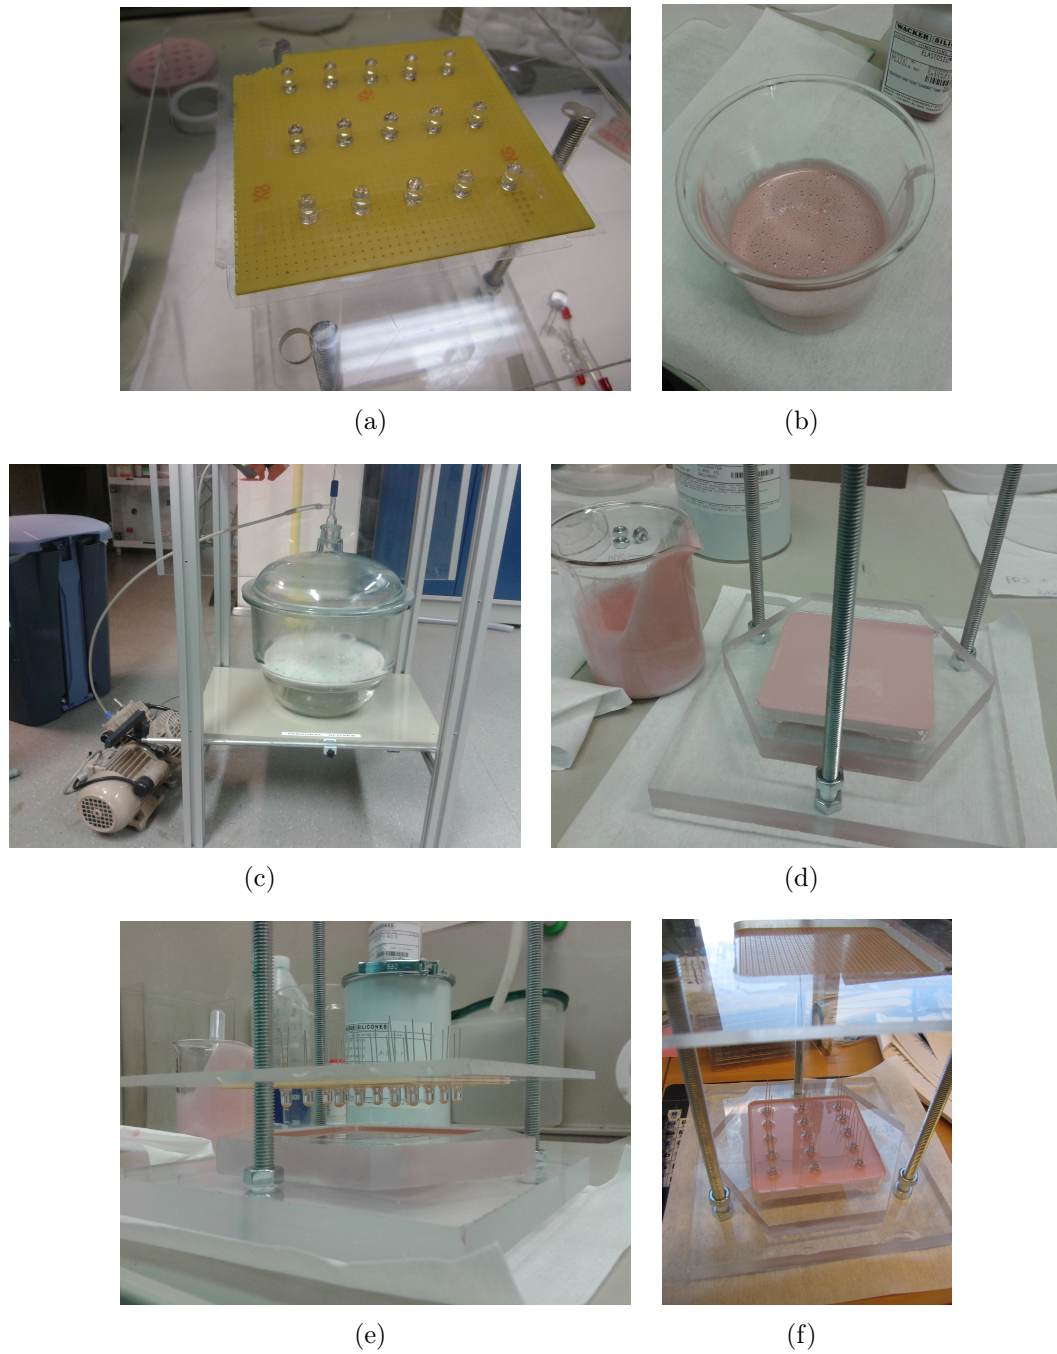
Presentation of the silicone LED-mold process flow. (a) The encapsulation device and molding component holder (FR-4) preparation. (b) Mixing of two-component silicone. (c) Air bubble removal in vacuum desiccator setup. (d) Dispensing of air bubble free silicone to molding cavity. (e) Bringing the copy-stage to a contact with the silicone through the screw rod, followed by 24 hour hardening time. (f) Lift-off of the copy-stage and a consecutive mold-component removal.
